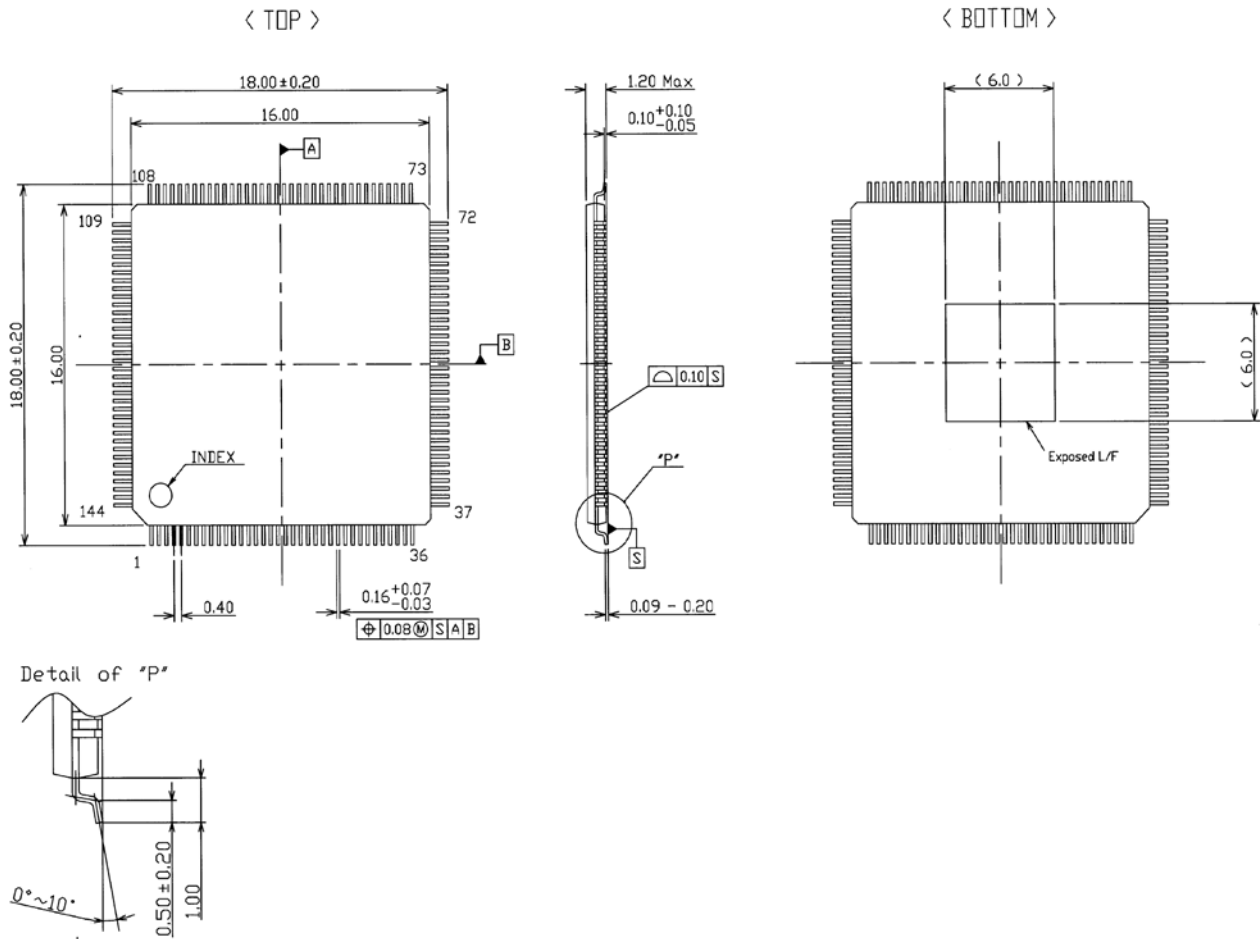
KL5BVCX400WMP package outline (Exposed TQFP-144 pins)
